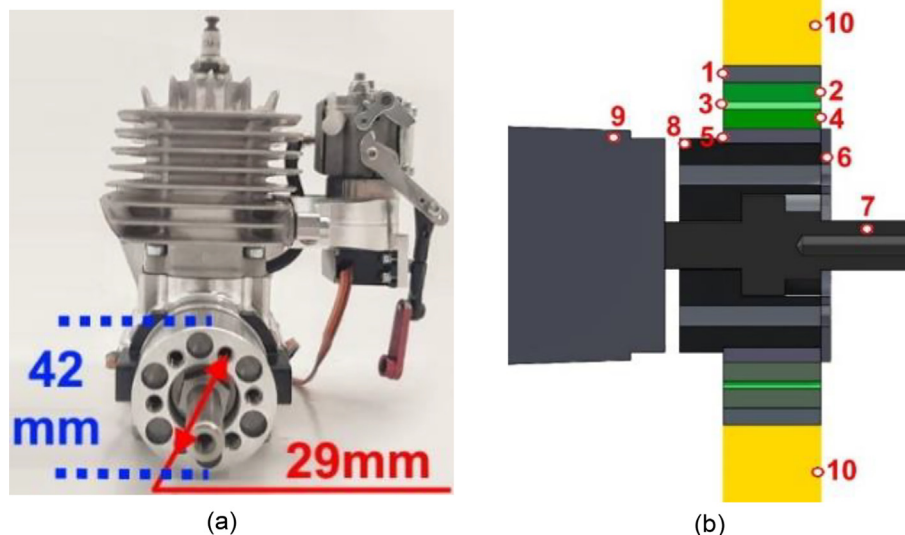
(a) 3W-70R2 piston engine flange (b) system model with magnetic coupling.
